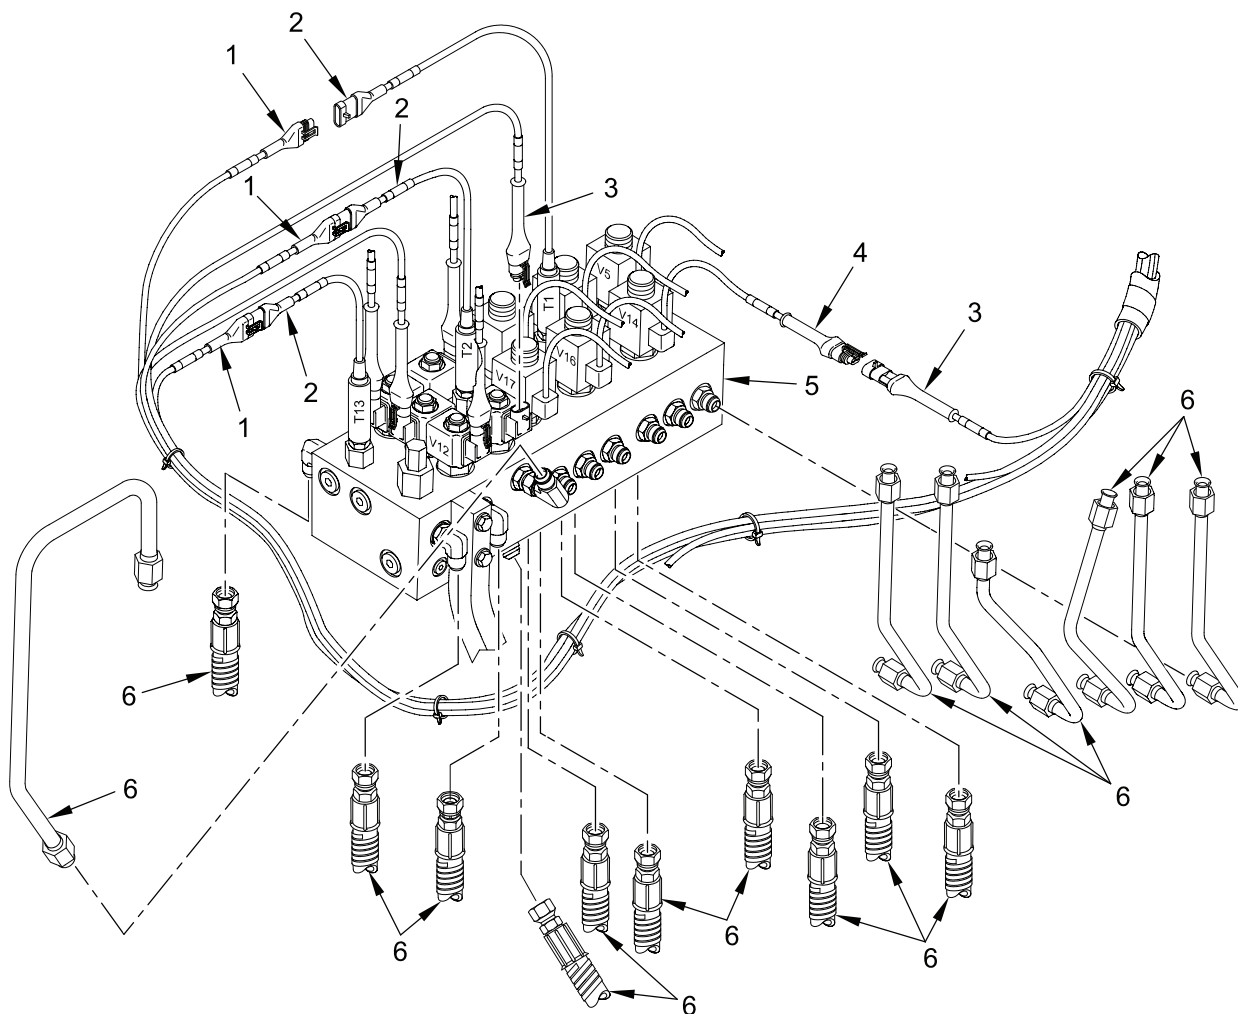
Installing HDC Primary Manifold Assembly and Mounting Bracket
